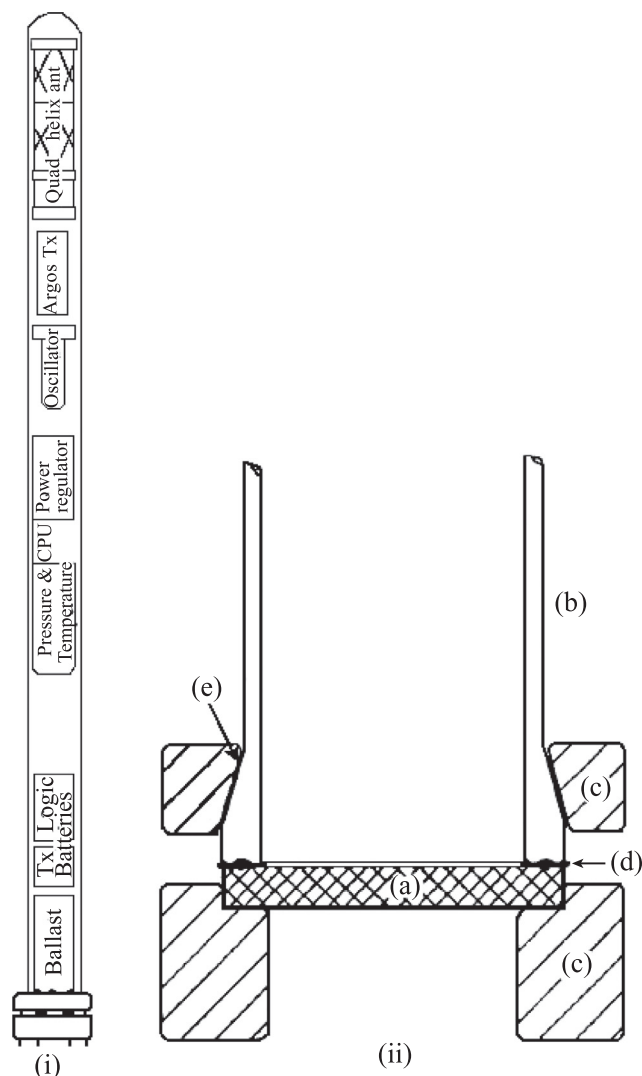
(i) Layout of the fully assembled subsurface drifter. (ii) Cross-section of glass pipe and endplate assembly. The aluminum endplate (a) is bolted to the glass pipe (b) by means of a polypropylene clamp assembly (c). A Teflon gasket (d) conforms to the shape of the glass end surface to provide a watertight seal. A thin vinyl or rubber pad (e) is fitted to the glass flange. (Source: Rossby and Dorson, 1983.)
